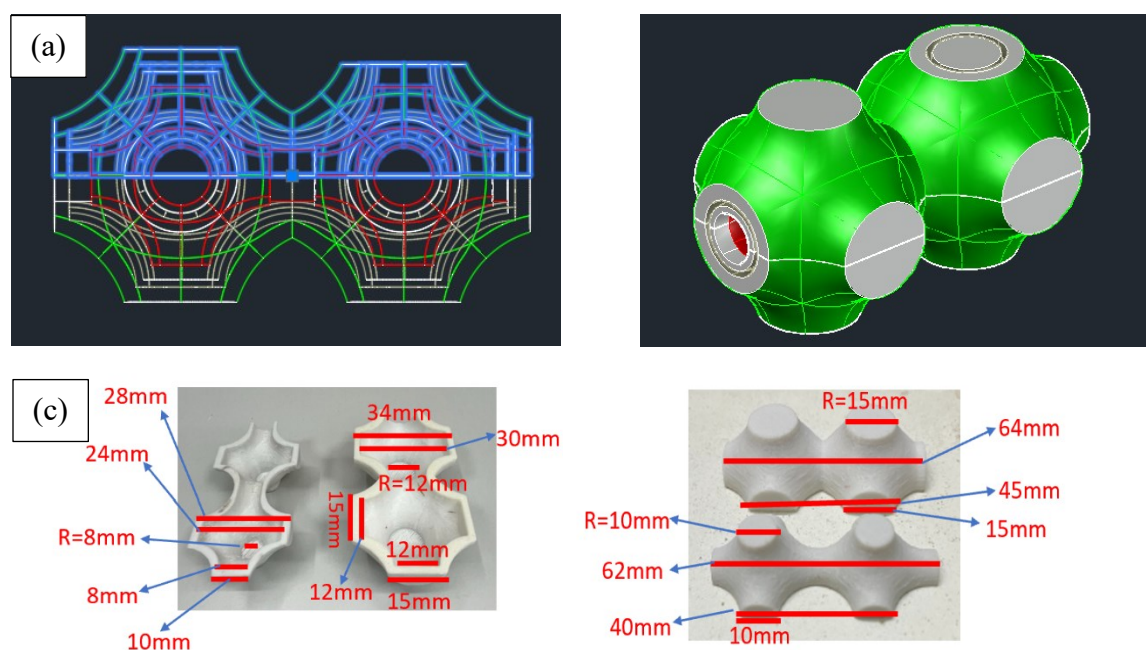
(a) Top view of primitive-structure sacrificial mold; (b) 3D view of primitive-structure sacrificial mold; (c) ABS sacrificial mold printed via FDM
